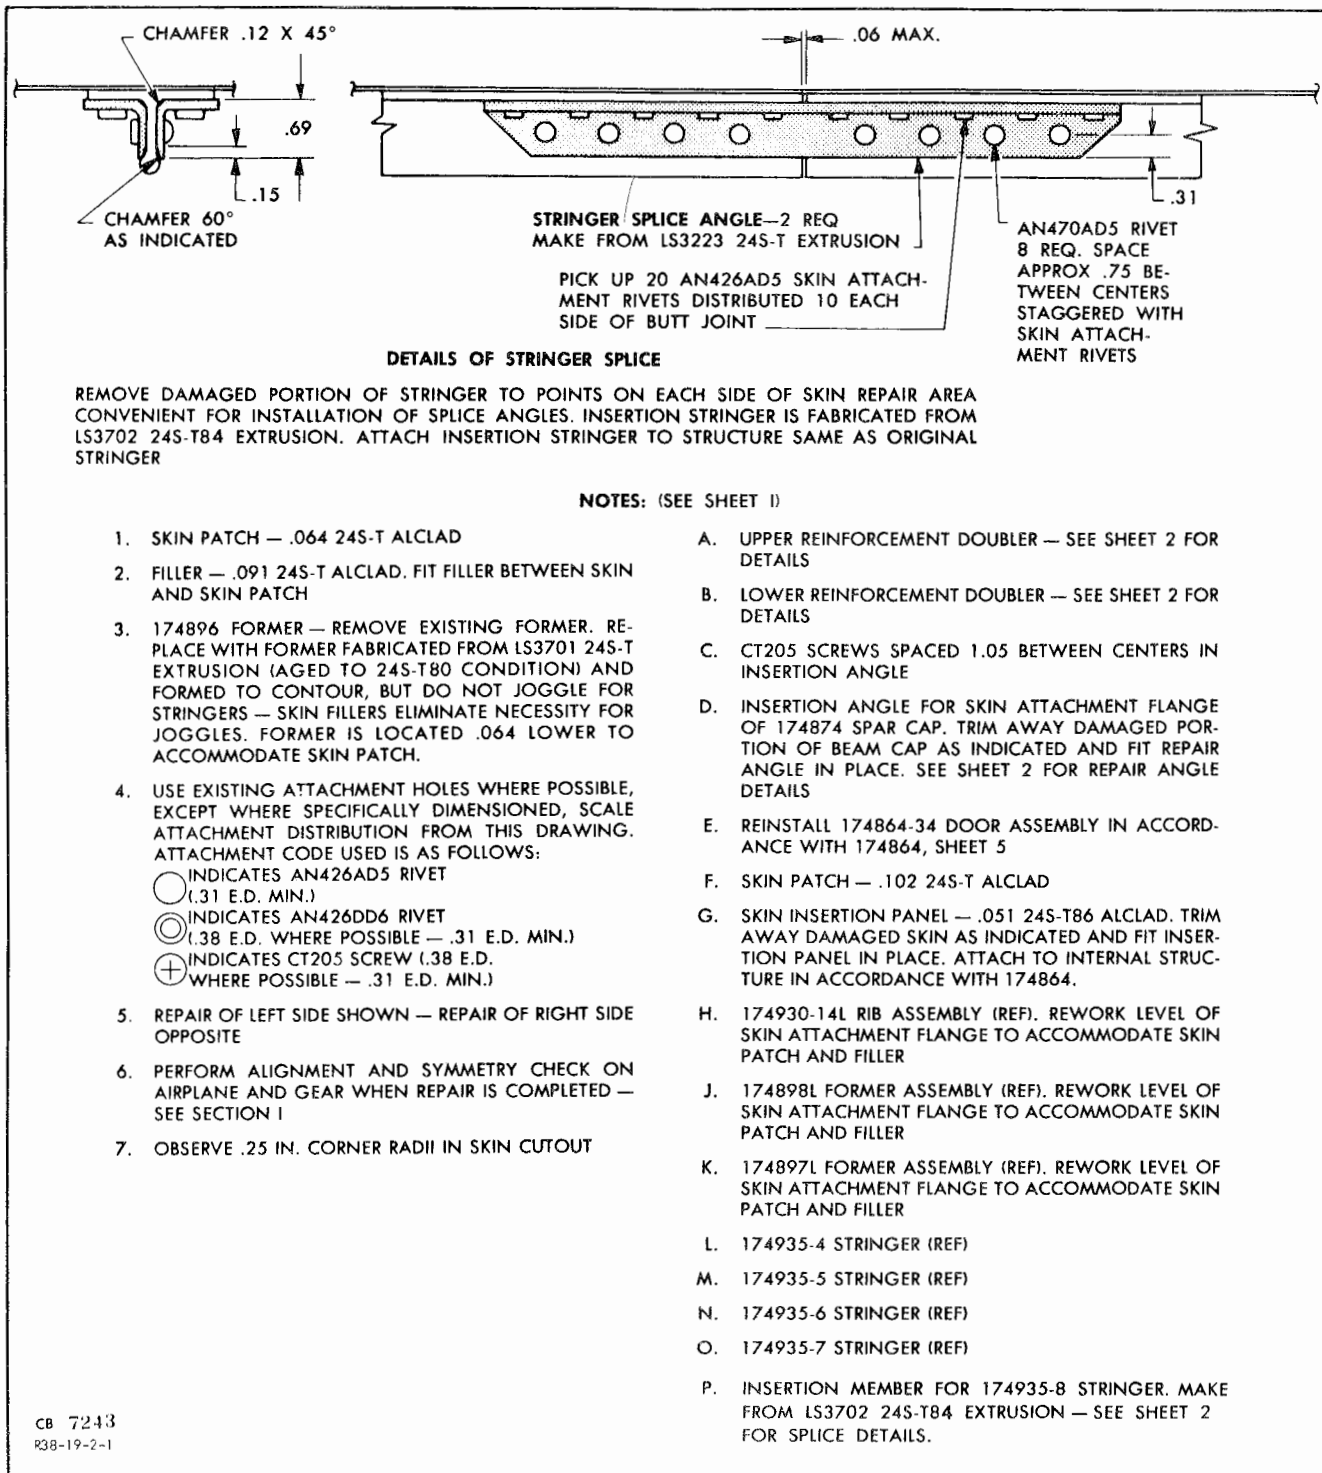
B (Sheet 3 of 3) — Repair of Wing Upper Surface and Rear Beam Skin Attachment Flange
